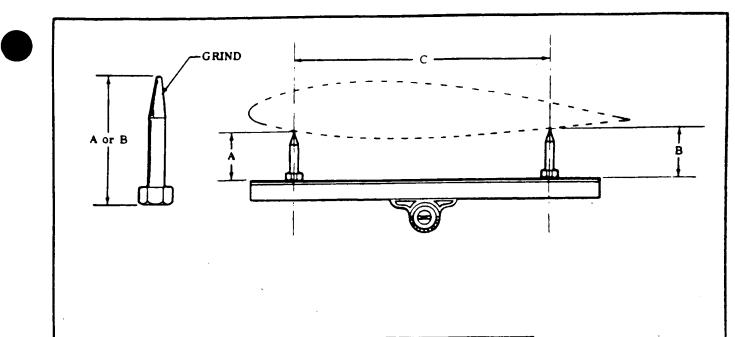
Control Surface Balancing (Sheet 4 of 4).
